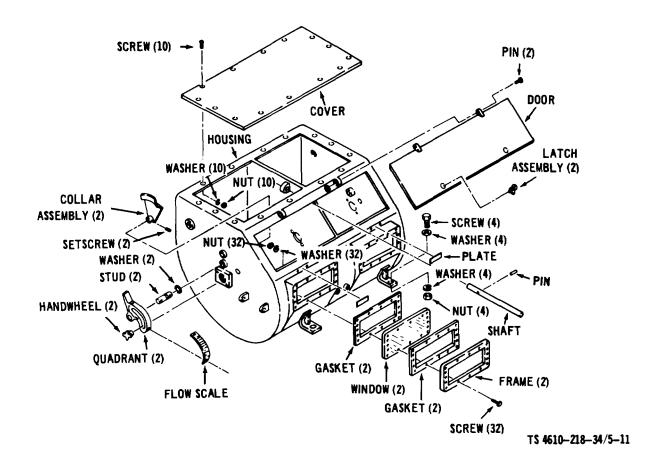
Slurry Feeder Housing, Disassembly and Reassembly
